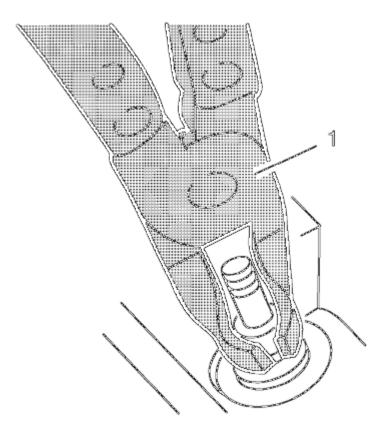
Valve Spring Retainer And Valve Spring Courtesy of GENERAL MOTORS COMPANY
